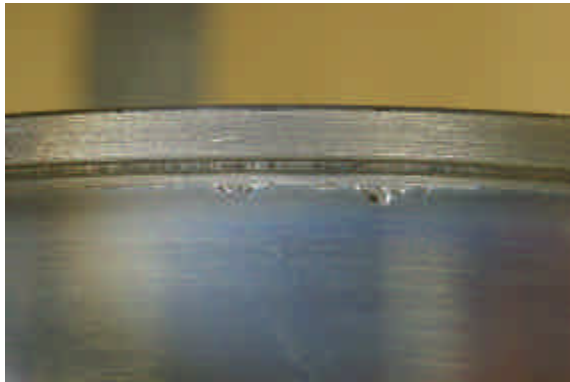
Inner race from the inboard position-two wheel bearing, showing a small area of surface spalling suspected as originating from misalignment after failure of the outboard bearing.
